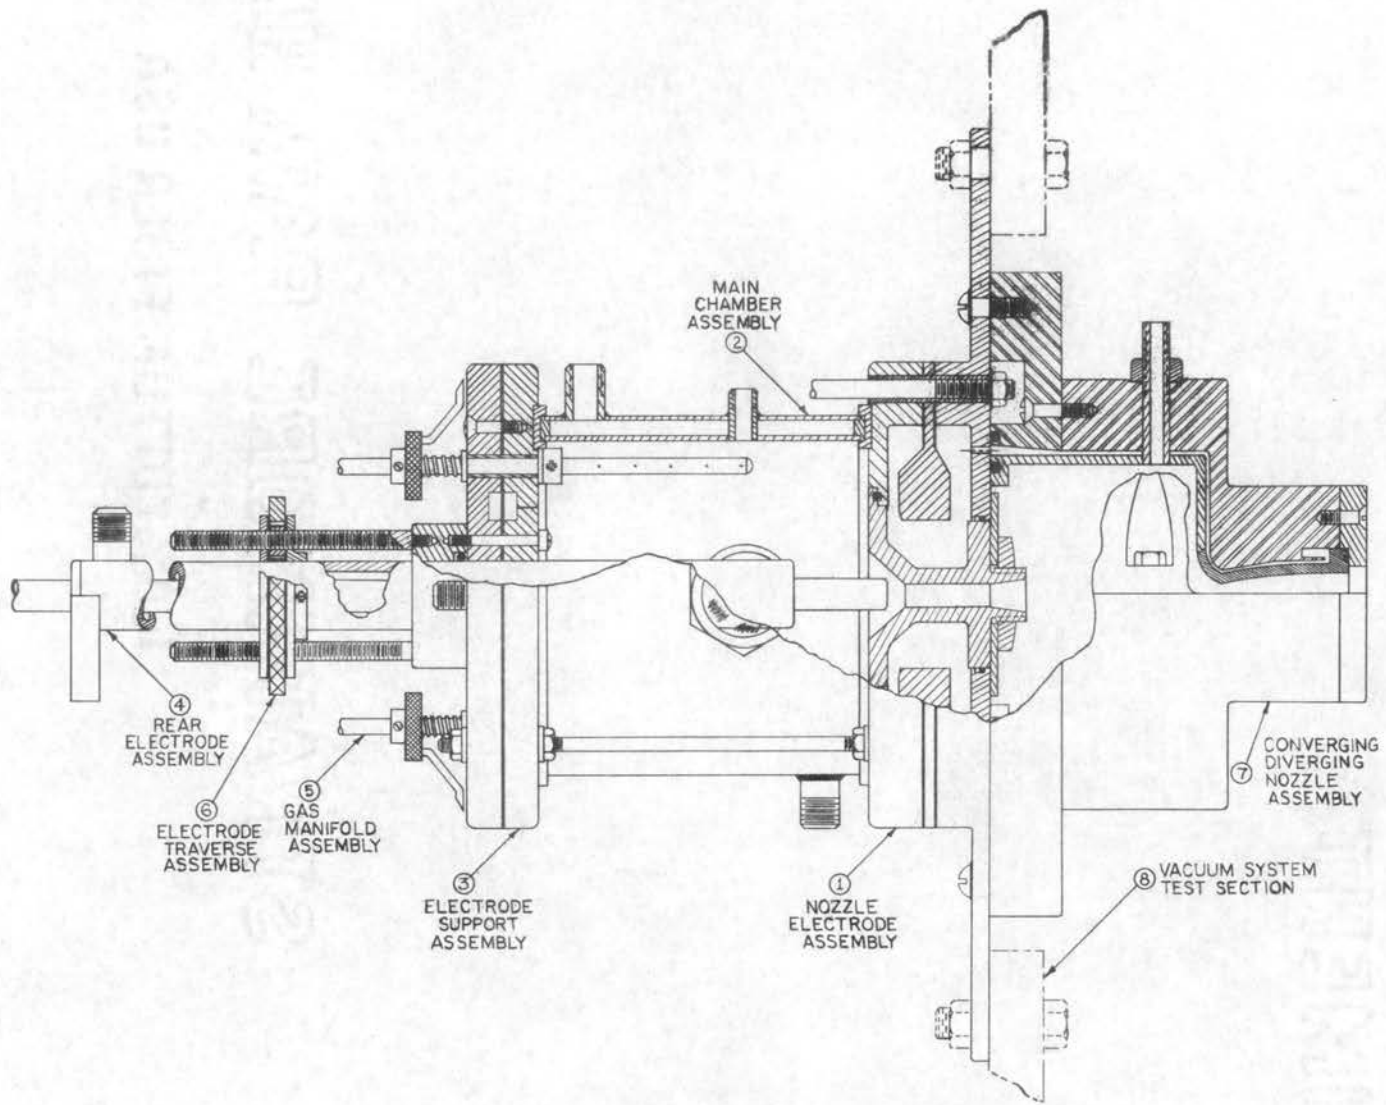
Plasma Generator-Expansion Nozzle Assembly
